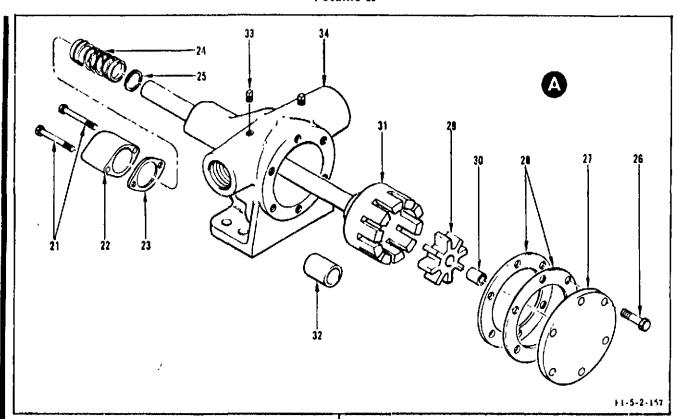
B. Scavenge Pump--Exploded View (Sheet 1 of 3)
